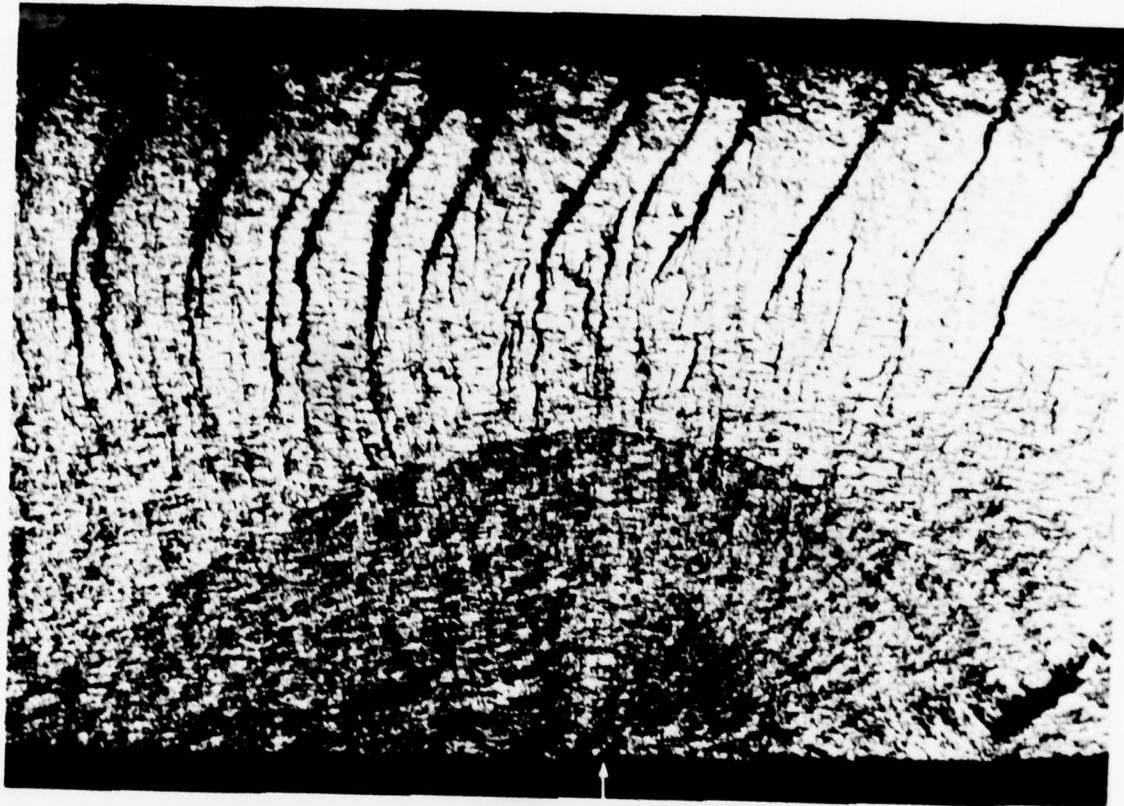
SHOWS WHEEL FRACTURE INITIATION AT PITTING CORROSION
